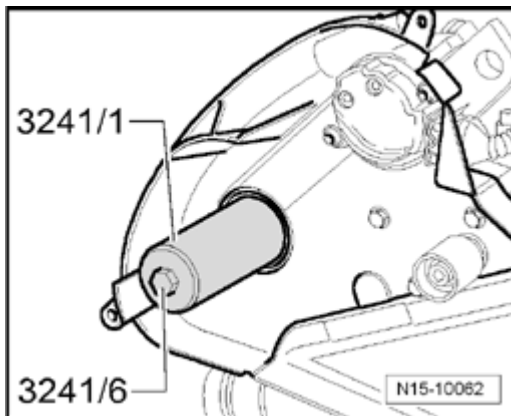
Pressing Oil Seal In Until Stop Using Thrust Sleeve 3241/1 And Bolt 3241/6
